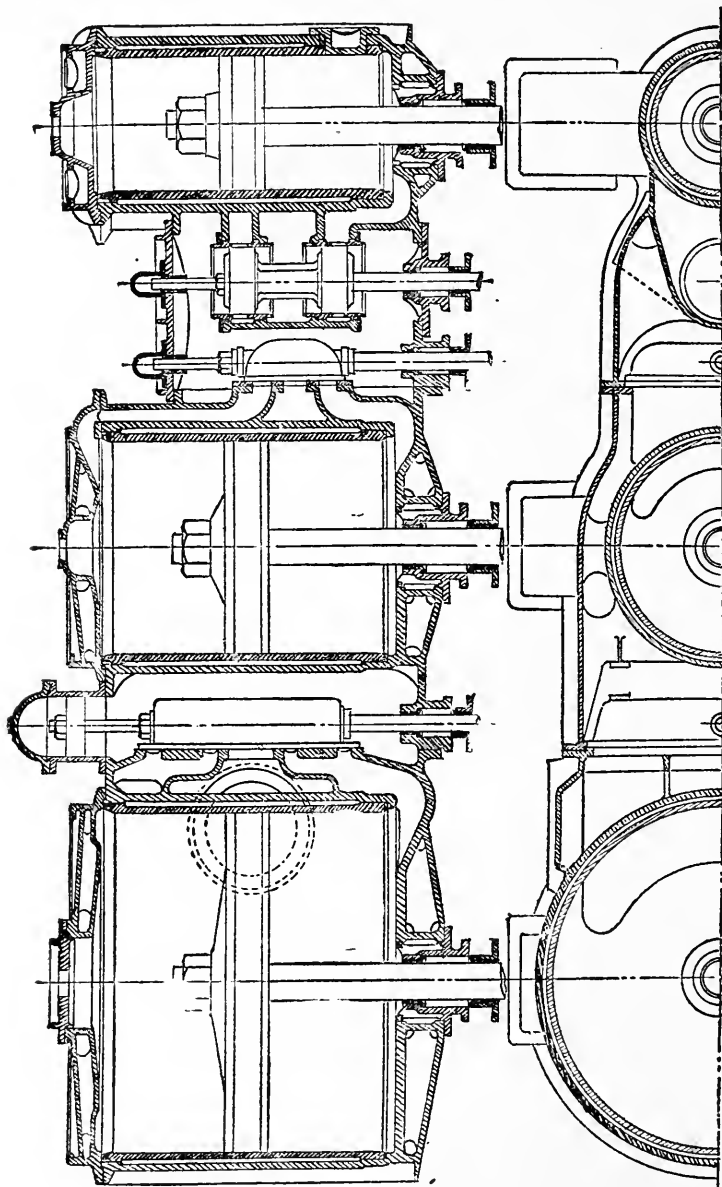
Cylinders of a Three-Crank Triple-Expansion Engine.
